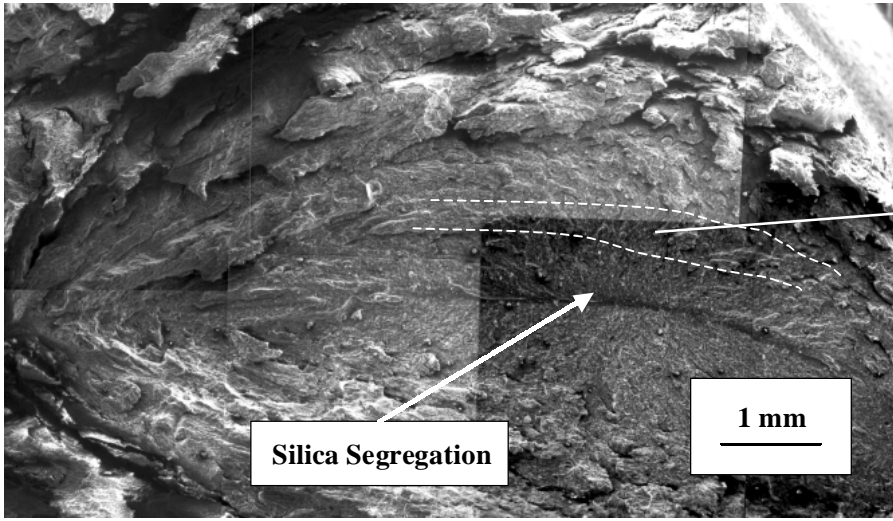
"Bean" Morphology of the Fracture Surface.
